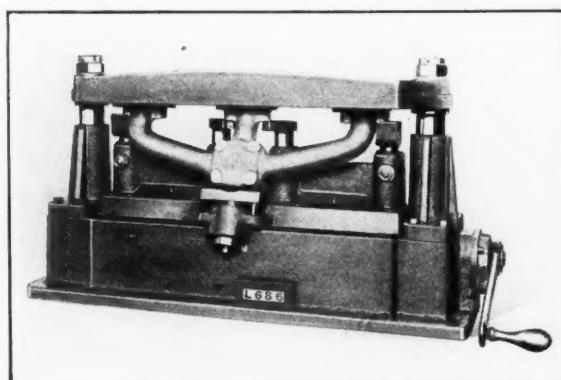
Swartz Standard Drilling Fixture for an Intake Manifold
